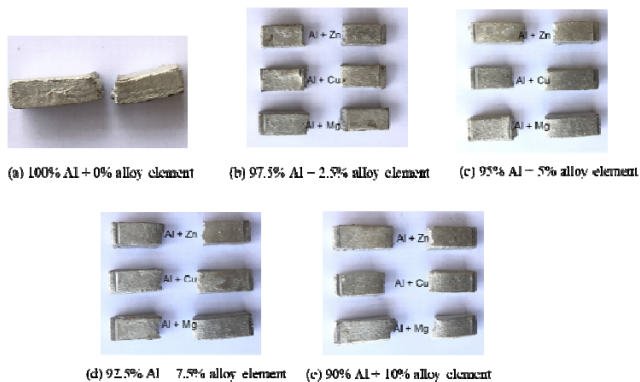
Specimen fracture due to impact test in different specimen combinations.
